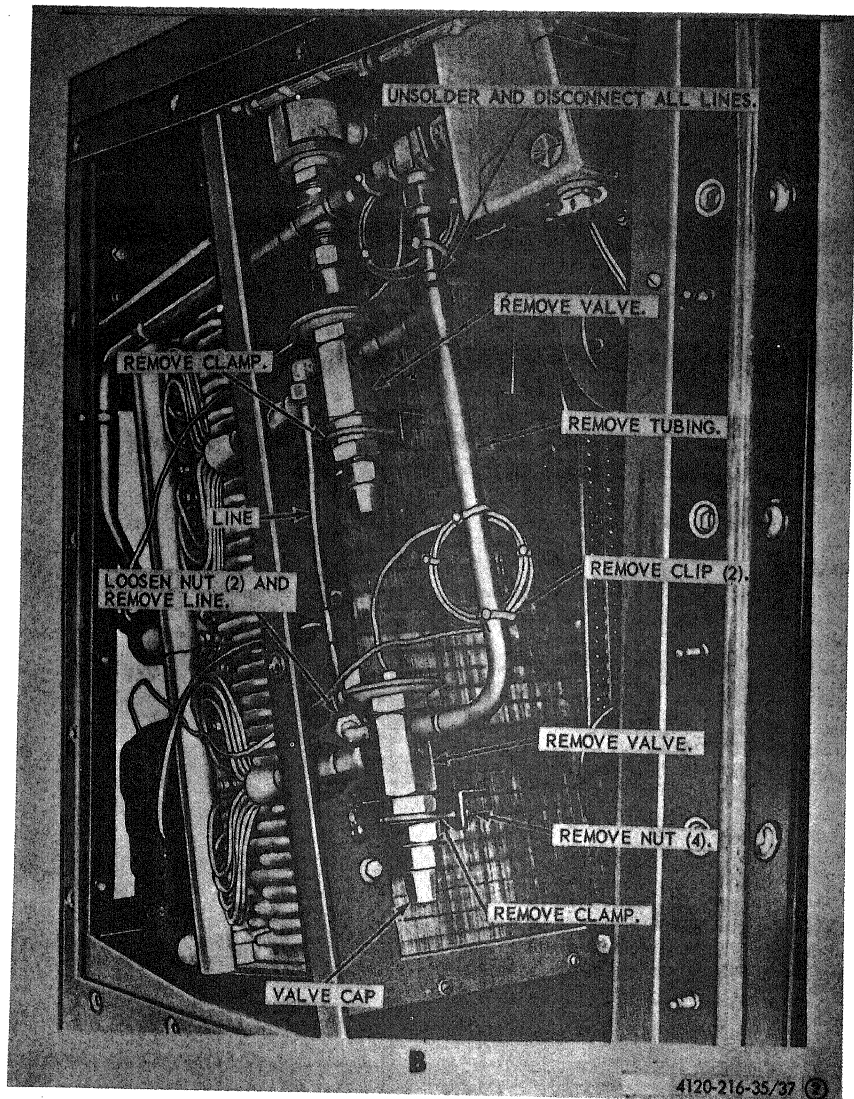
①. Thermostatic expansion valves, bulbs and tubing, removal and installation.
